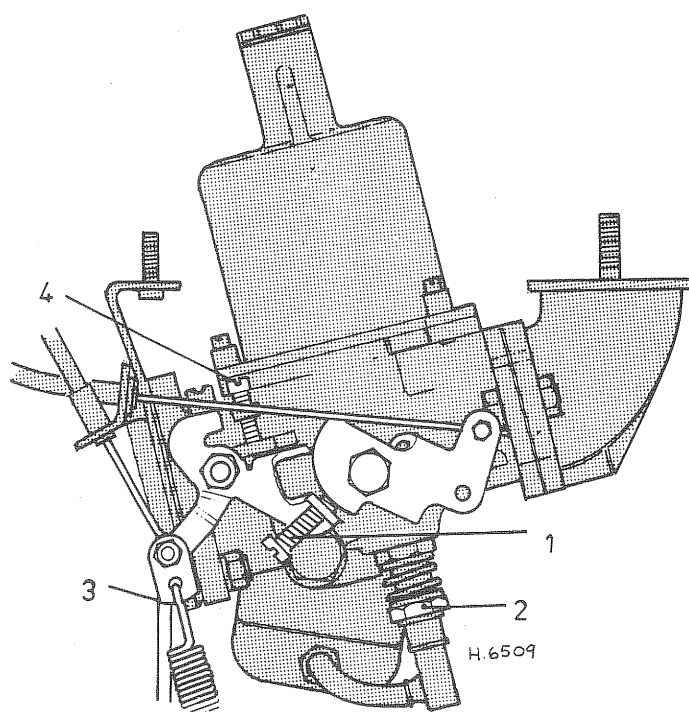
Carburettor adjustment points – SU HS4 (Sec 19)
